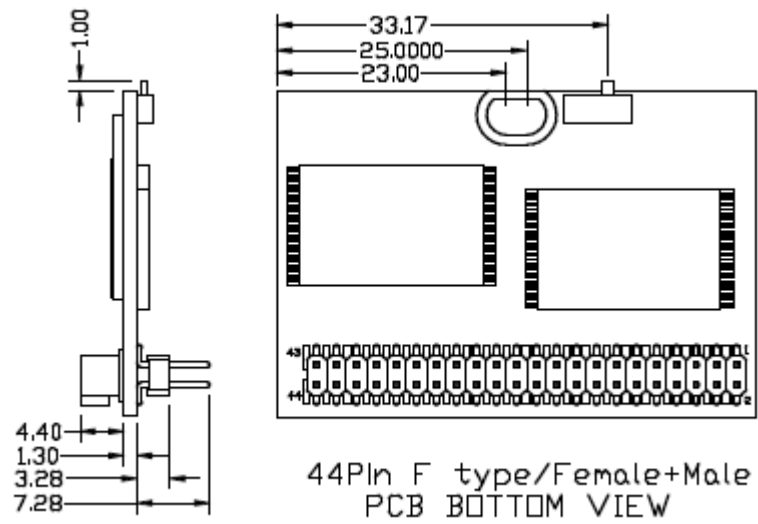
Mechanical Dimension of EDC1SE 44-pin (Horizontal Male/Female Type F)
